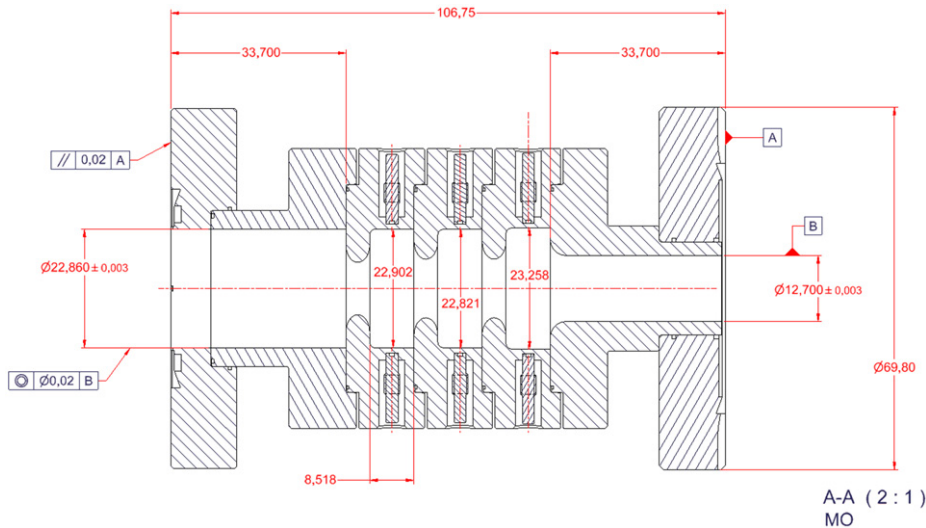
Mechanical drawing of molybdenum structure with dimensions.
